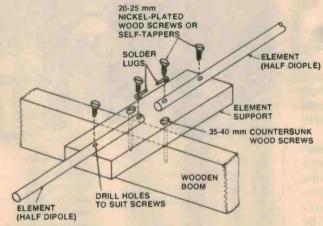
Element-to-boom mounting using wood construction. Estapol or stain all wooden components before assembly.
